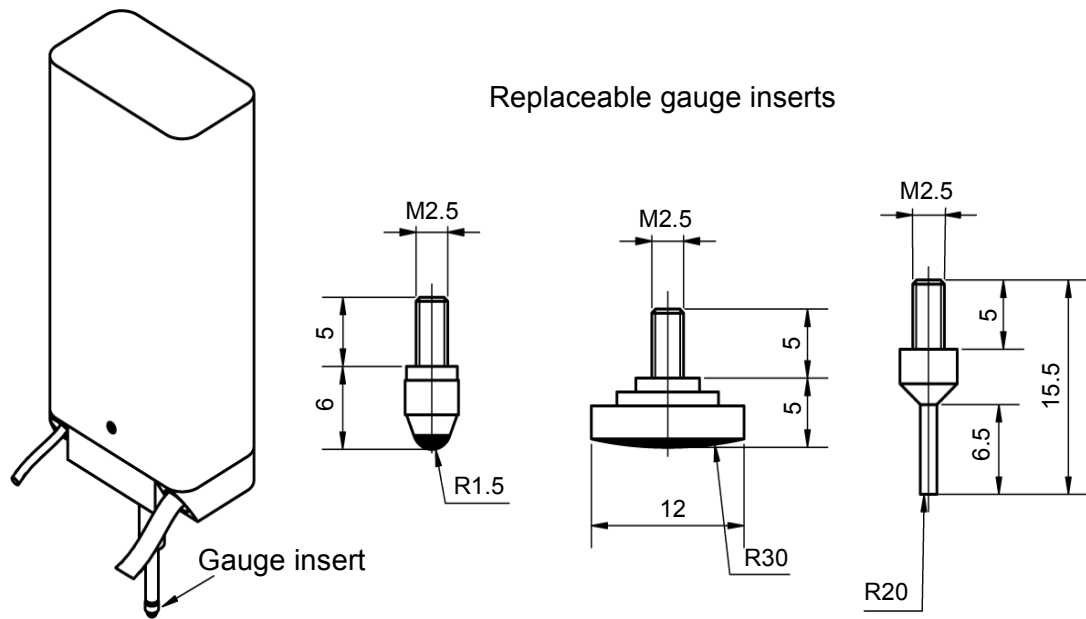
Dimensional drawing of the replaceable gauge inserts
